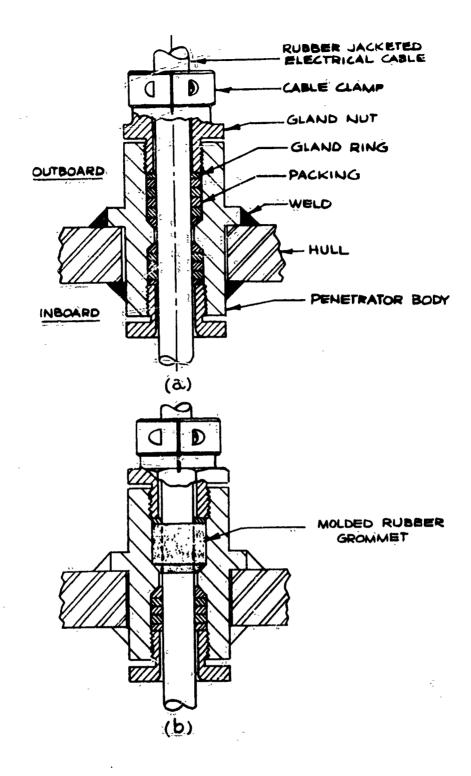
Through Cable Penetrator with Grommet Cable Seals
